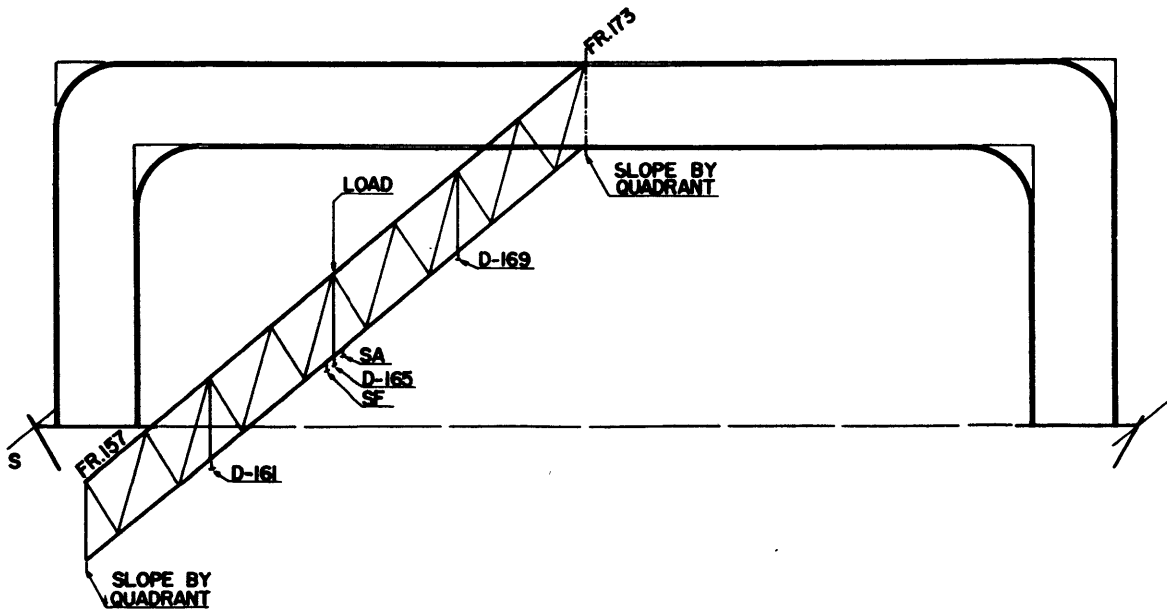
USS YORKTOWN - Schematic Outline of Longitudinal Girder, Frames 157-173
